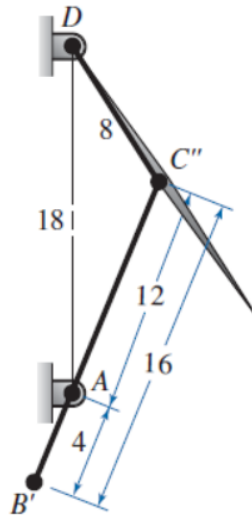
Movement Mechanism for Conveyor Segment Minimum Position
